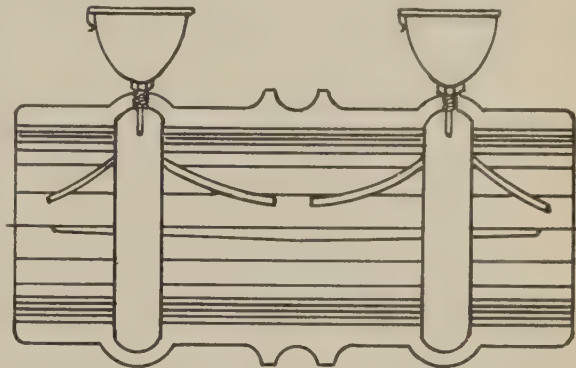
A ring oiling with rings removed and cups or bottle oilers installed. Note the chamfer Fig. 3. Showing proper grooving of top half of ring oiled bearing
